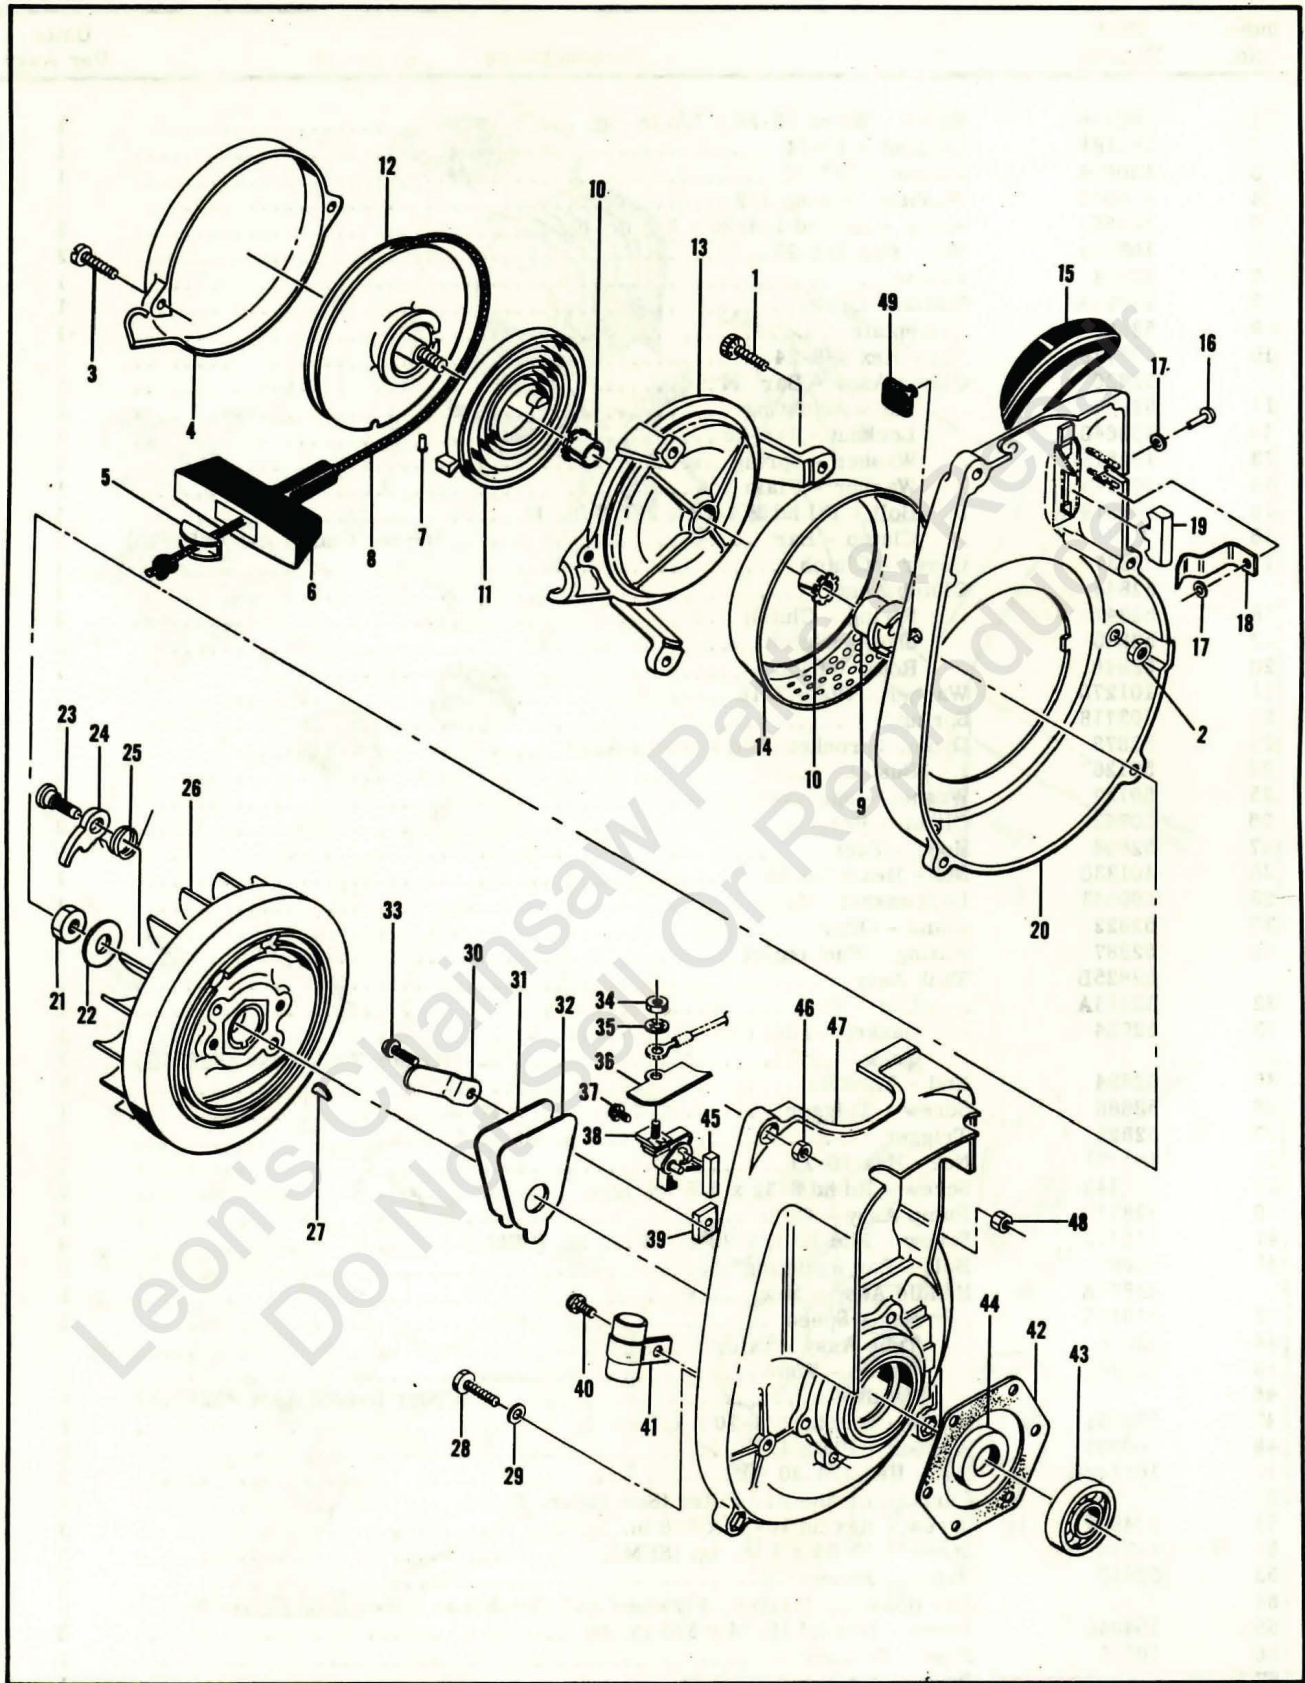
Fan Housing, Starter, Flywheel and Crankcase Cover
